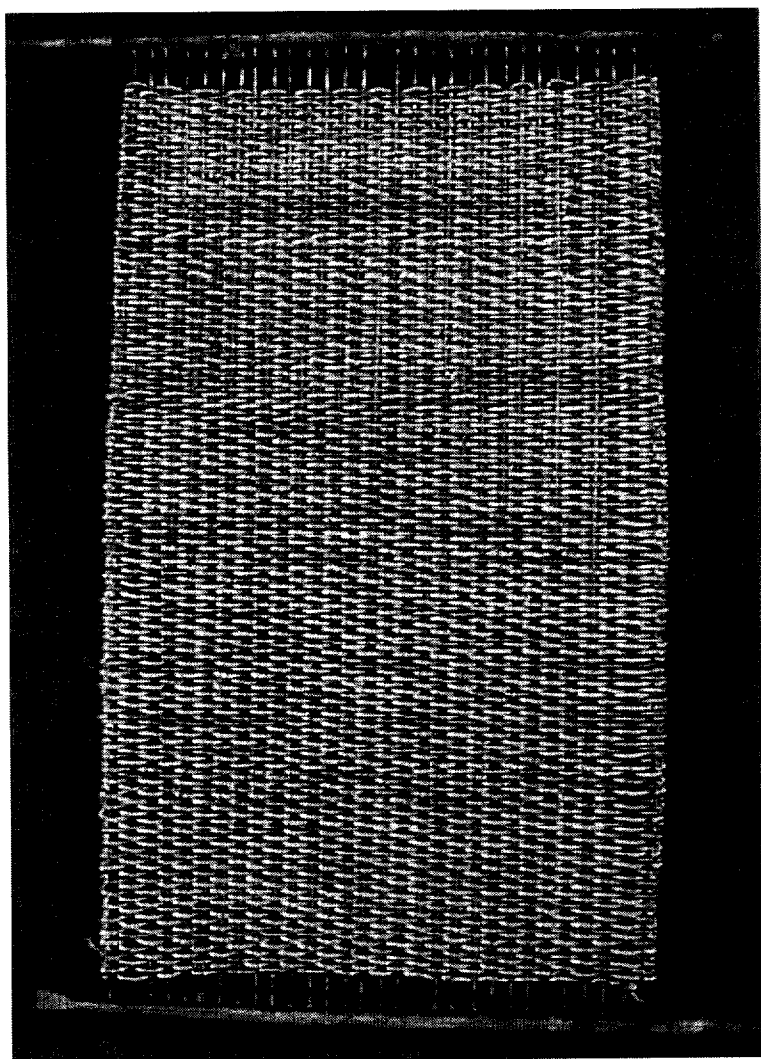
Photo of the spring wire woven heat exchanger⁽²²⁾
